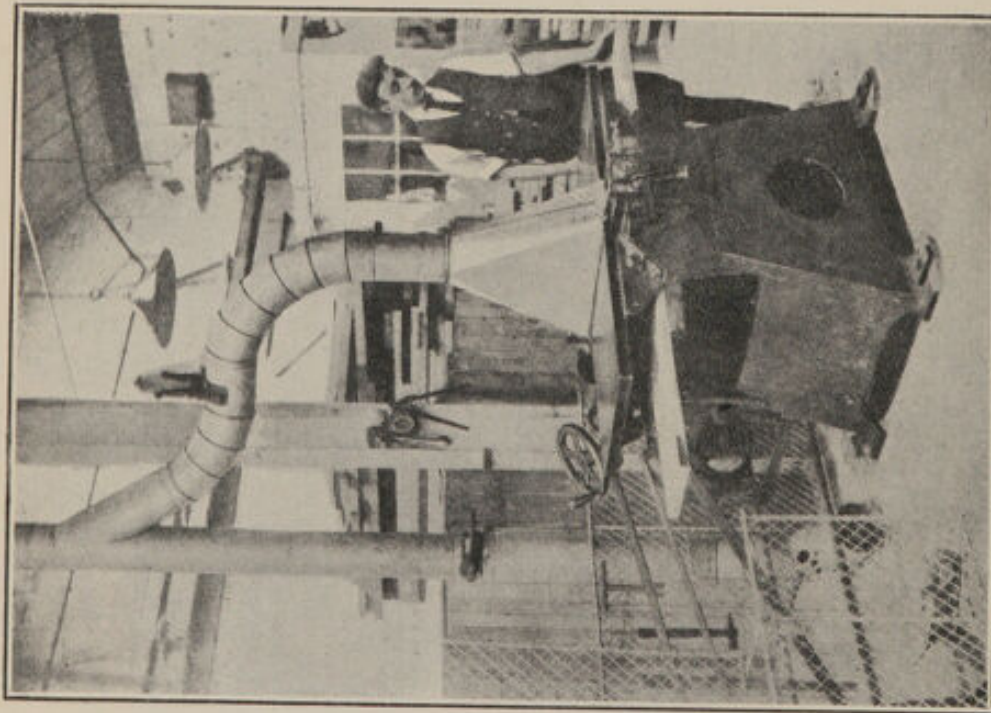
Collecting Shavings from Planing and Thicknessing Machine, with Lower Table and Upper Hood in use, the Lower Hood being disconnected. (Messrs. Sturtevant Engineering Co., Ltd., London.)
